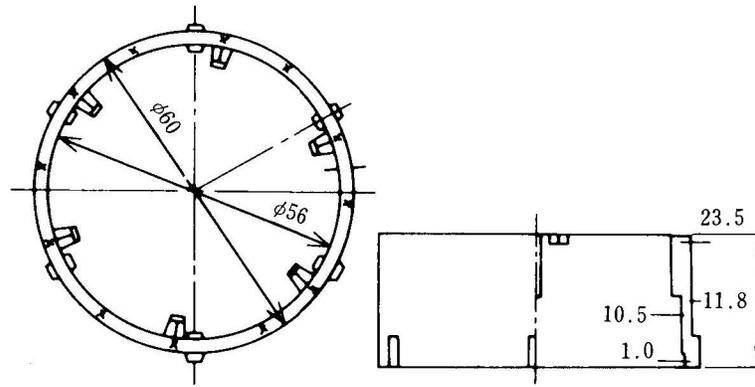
Shape of molded piece and Position of dimension measurement
